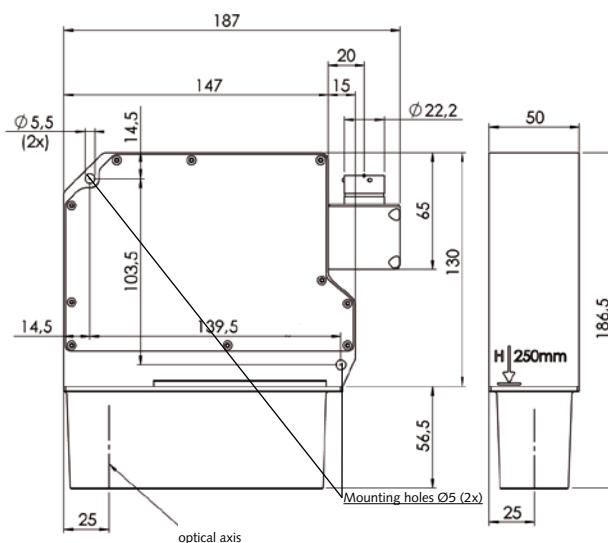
Dimensions Correvit® S-HR sensor with 90° connector
